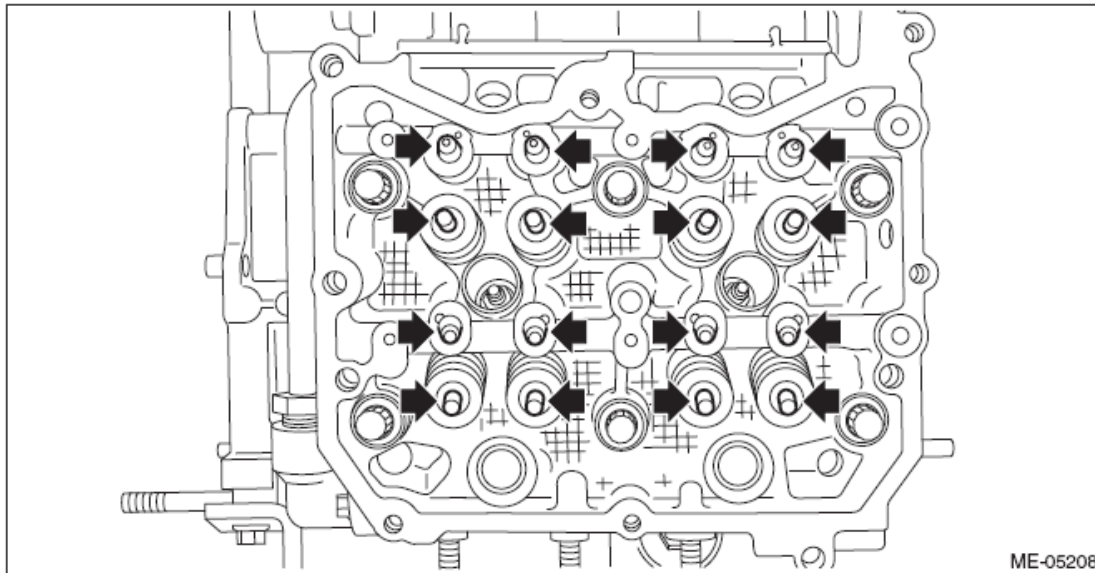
Locating Valve Shim And Roller Rocker Arm Pivot
